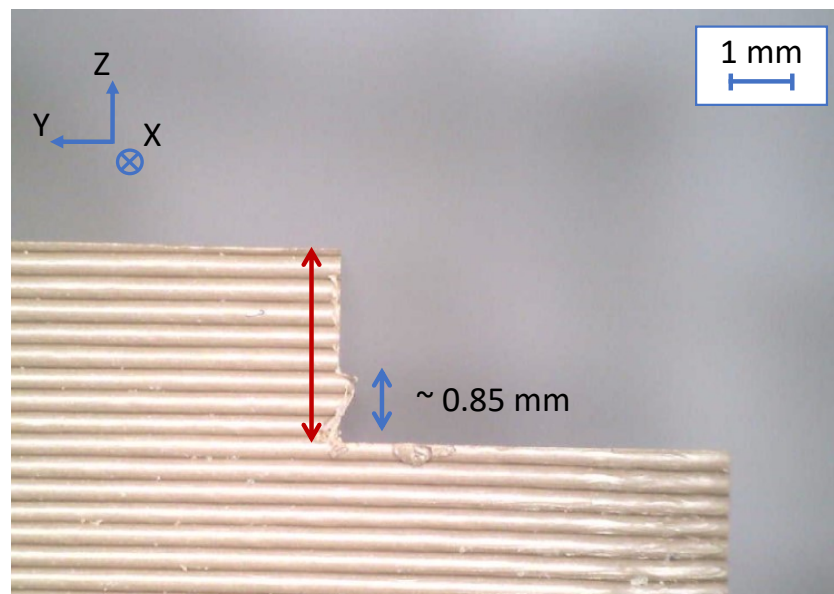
Side view of the milled straight shoulder for the thermoplastic tool.
